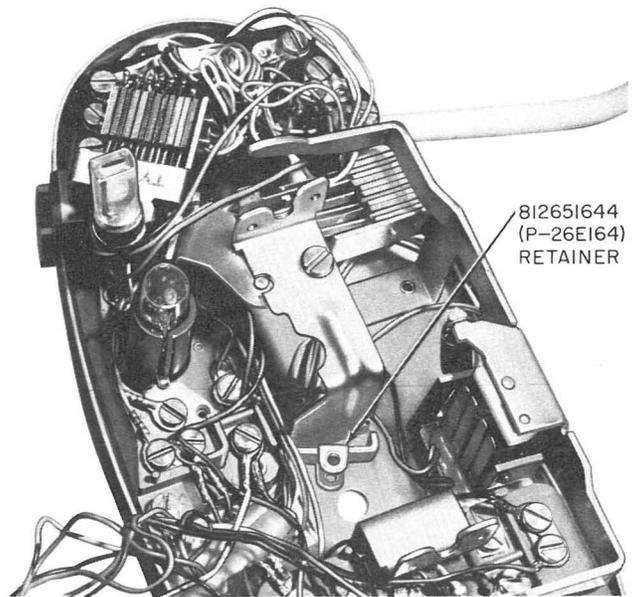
▶Installing Terminal Board Retainer in PRINCESS® Telephone Set◀
